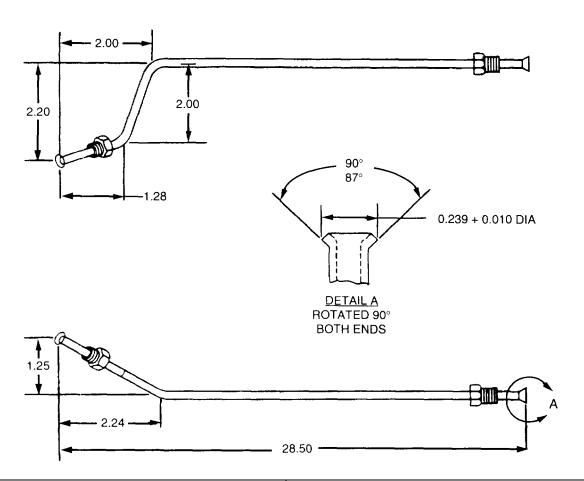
Hydraulic Brake Tube Assembly, Rear (M101A3, M116A2E1, and M116A3)
